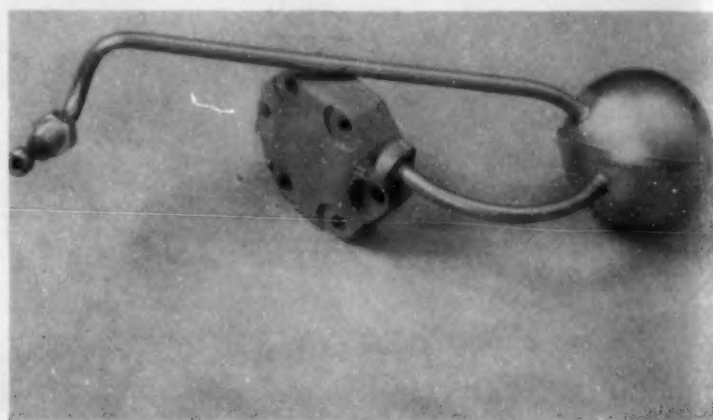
Muffler-and-head assembly, made of steel stampings, steel tubing, steel screw-machine parts, and a permanent-mold iron casting. This assembly has 5 copper-brazed joints.
